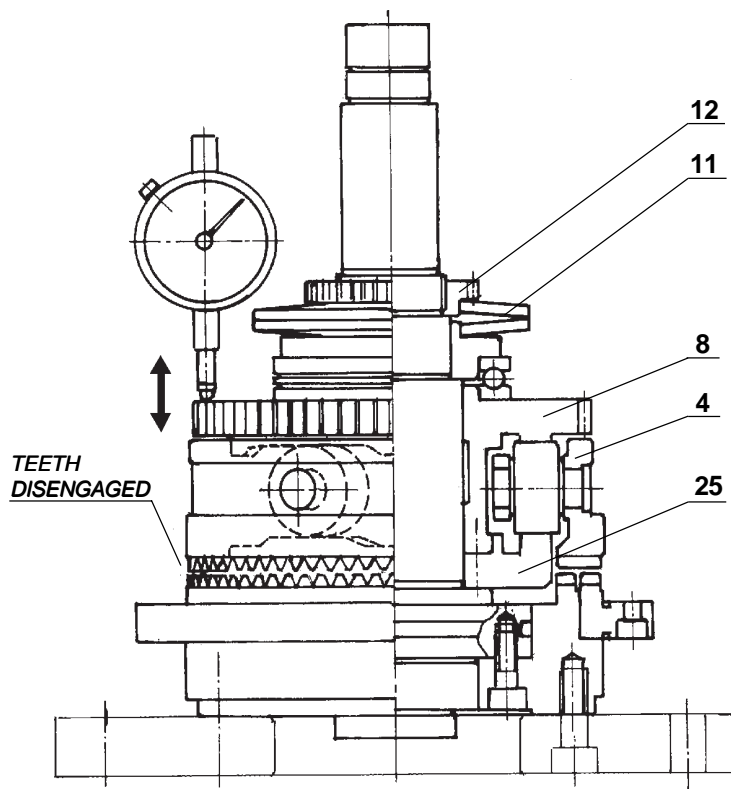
INSPECTION OF AXIAL CLEARANCE OF DRUM CAM ASSEMBLY
